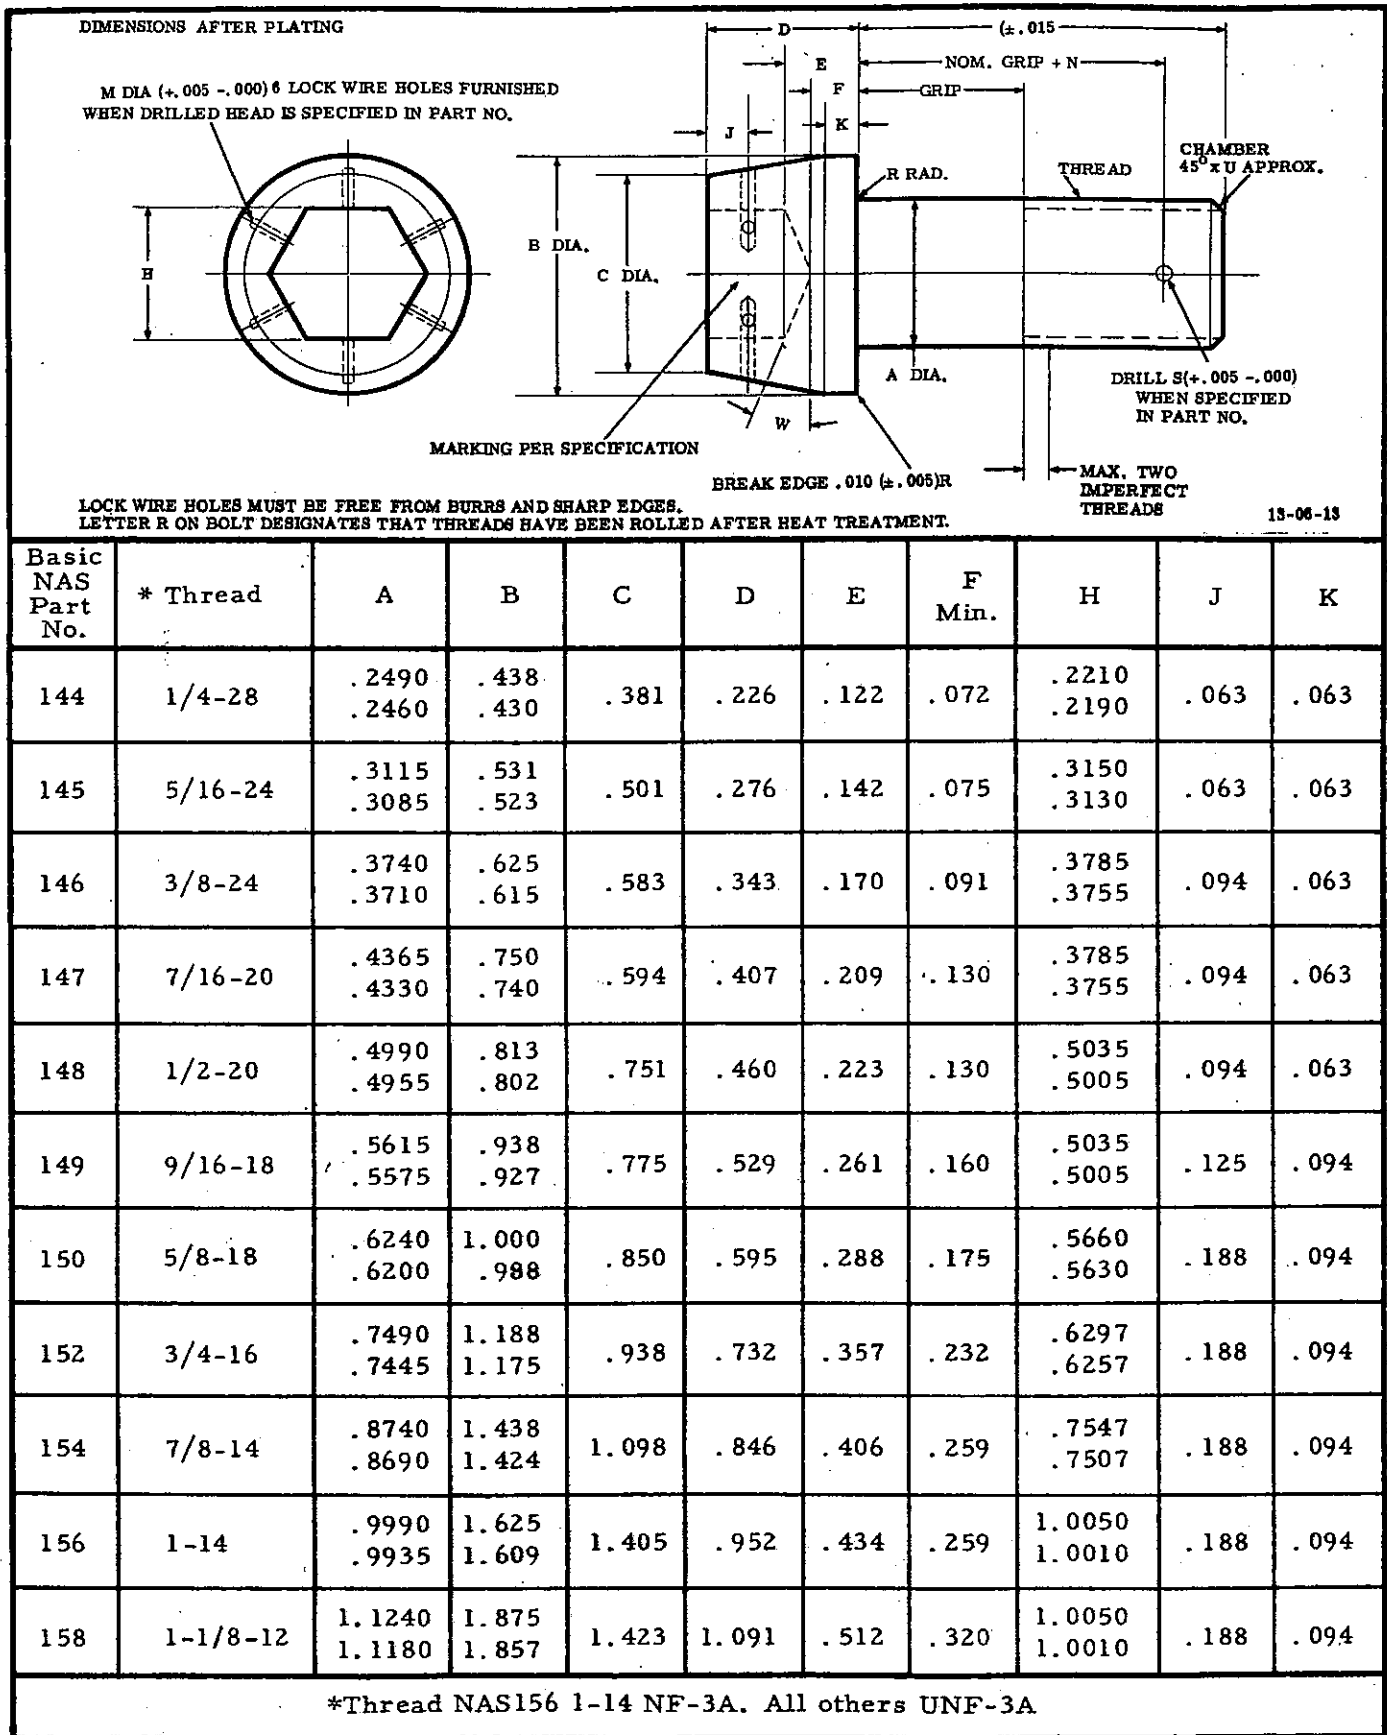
(Sheet 1 of 6) Bolt, Internal Wrenching (NAS144 to NAS158)
